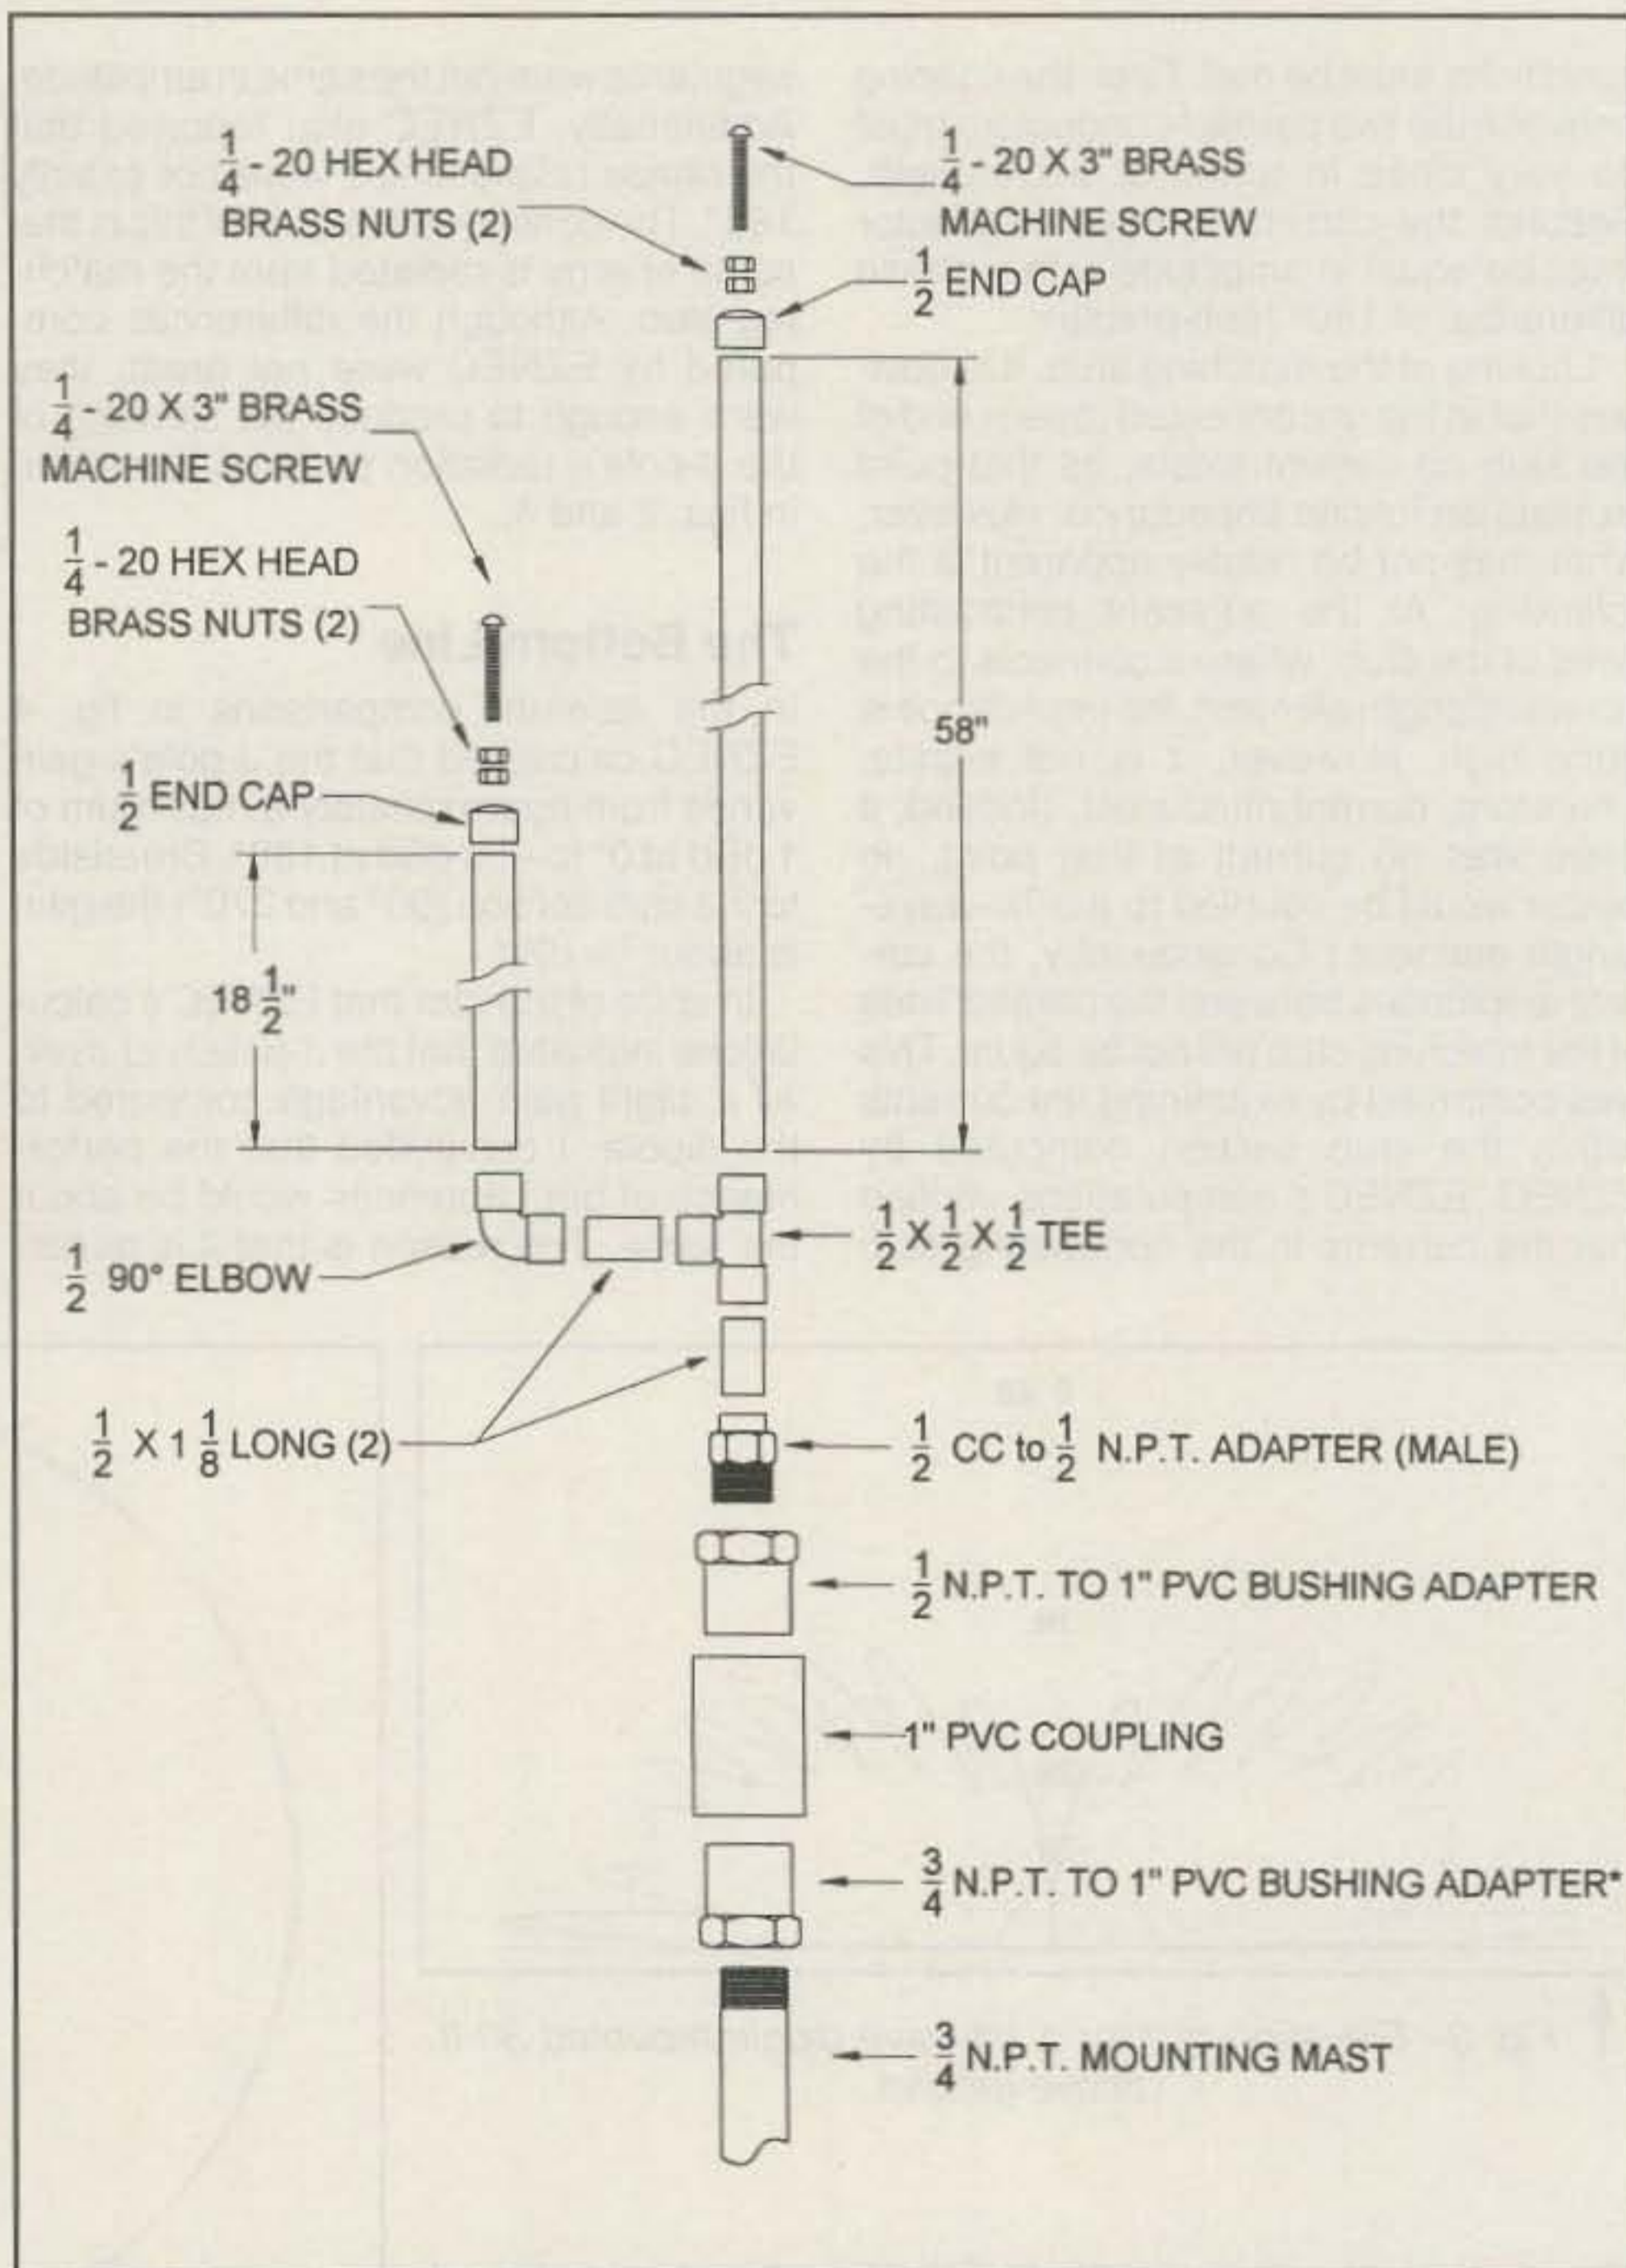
Parts assembly and dimensions for a 2 meter J-pole.
